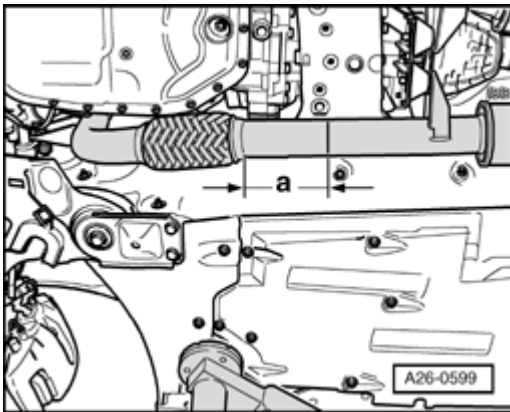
Separating Right Exhaust Pipe Using Chain Pipe Cutter VAS 6254
